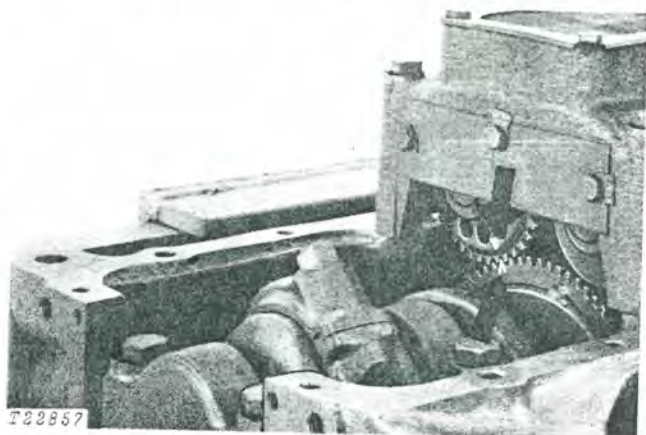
Balancer Timed with Crankshaft Drive Gear
